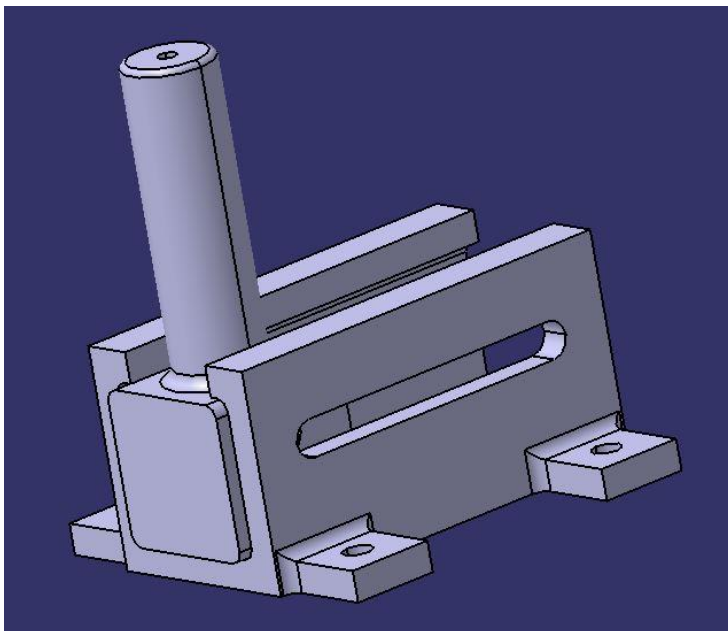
Sliding block and rail assembled in Catia v5. The threaded rod is not shown.
